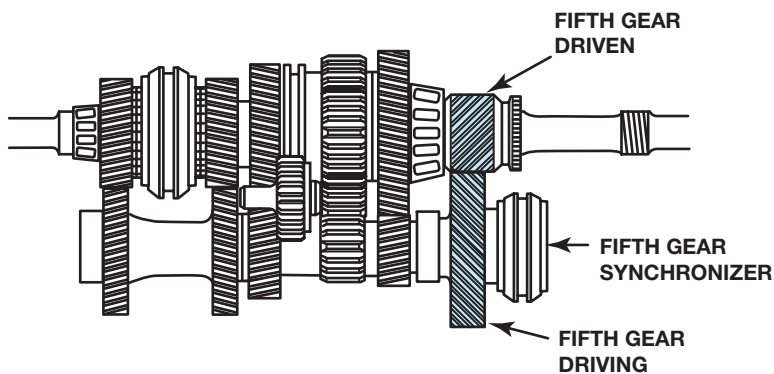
Notice the gear teeth in this transmission; those on the fifth gears have a finer pitch and a greater helix angle, to produce quieter operation while cruising.
